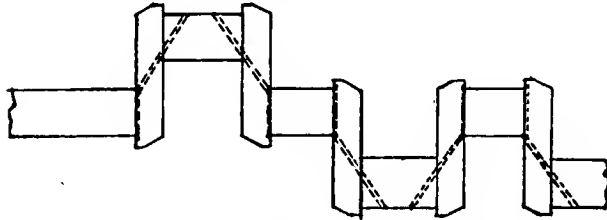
Section of crankshaft for four-cylinder motor, having five main bearings, and showing one method of drilling shaft to lubricate connecting rod bearings.
